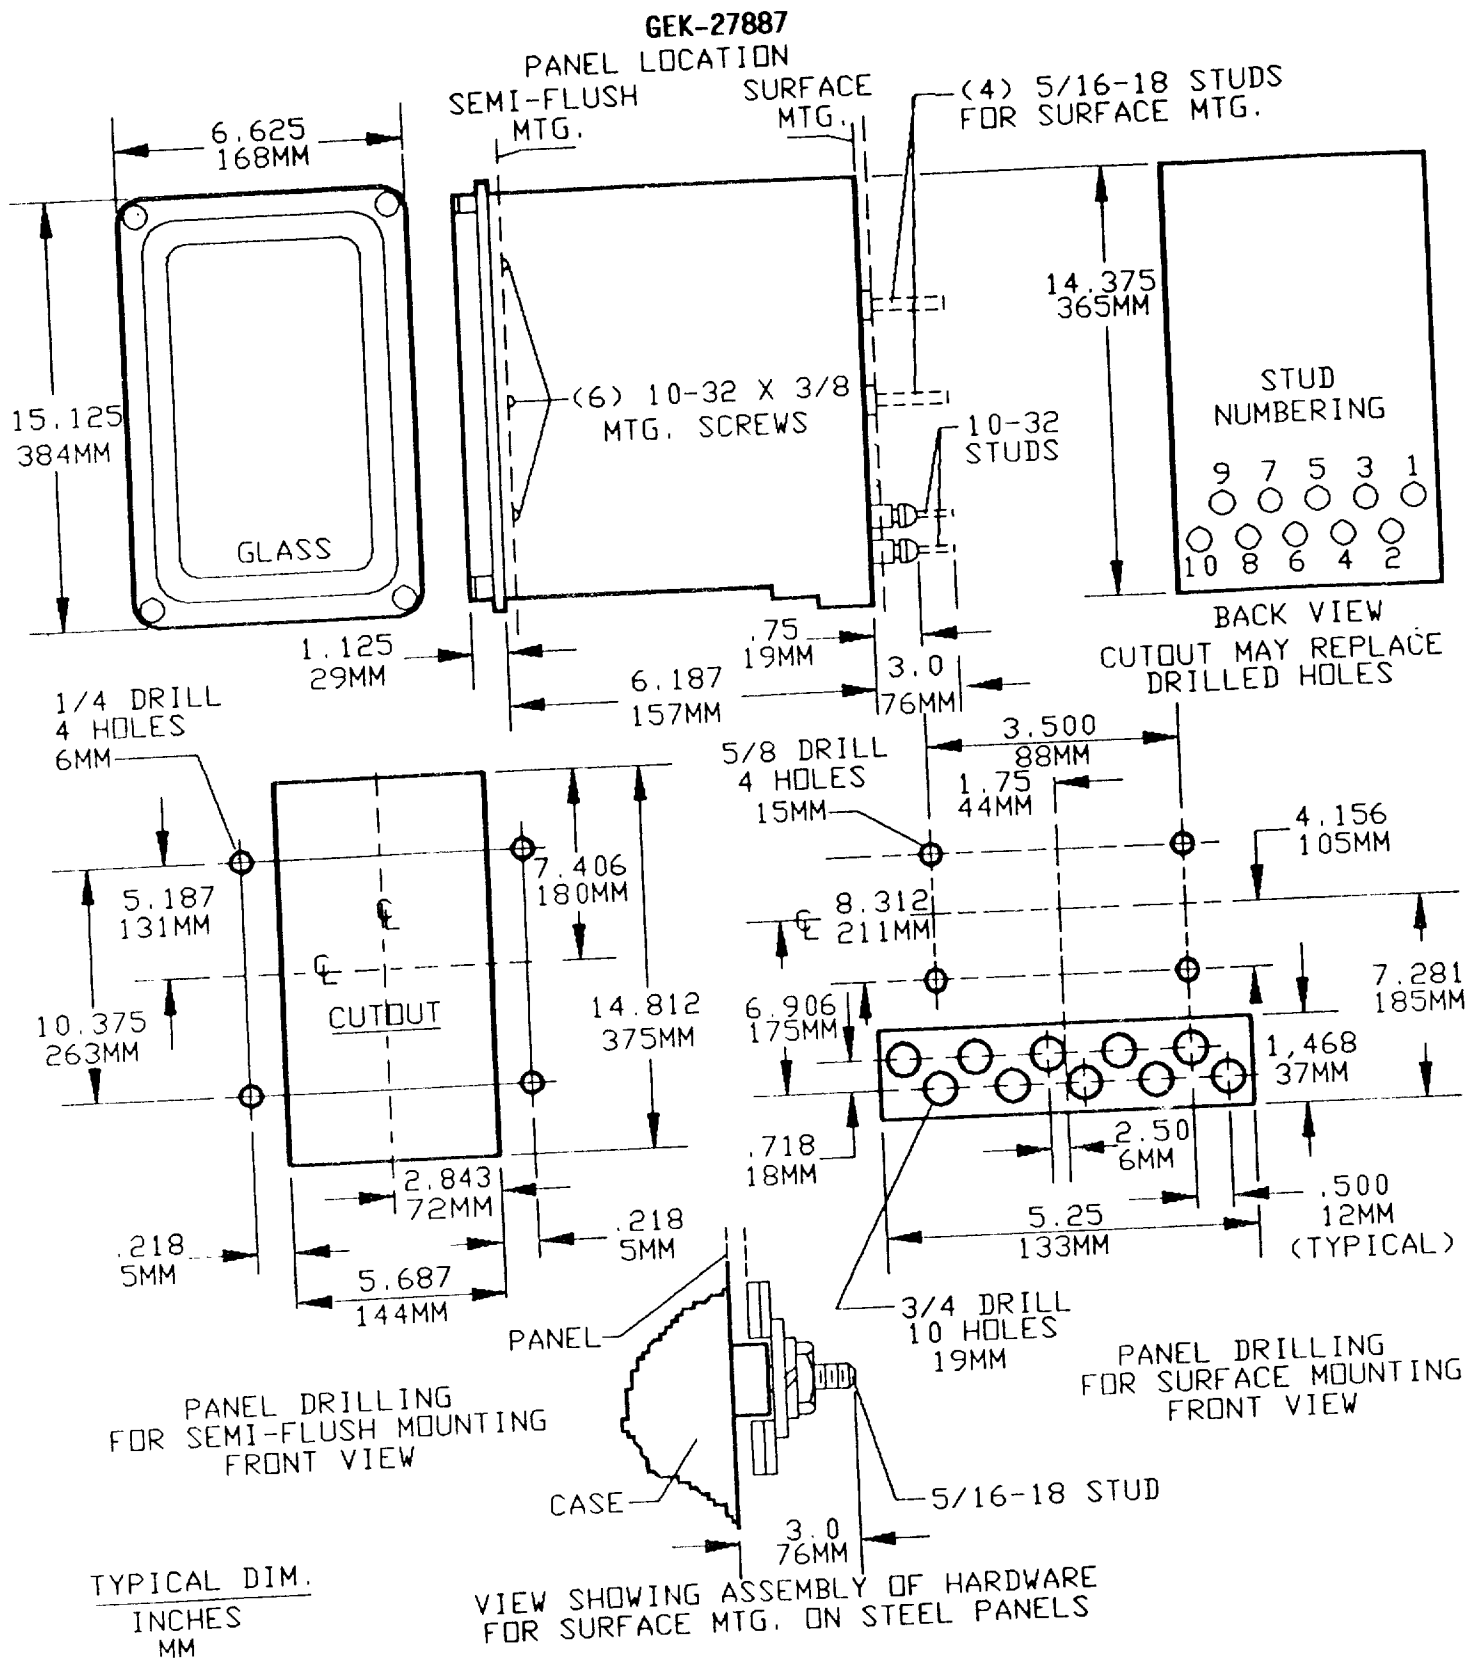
(K-6209273-5) Outline and Panel Drilling Dimensions for Type CEH51A Relay
